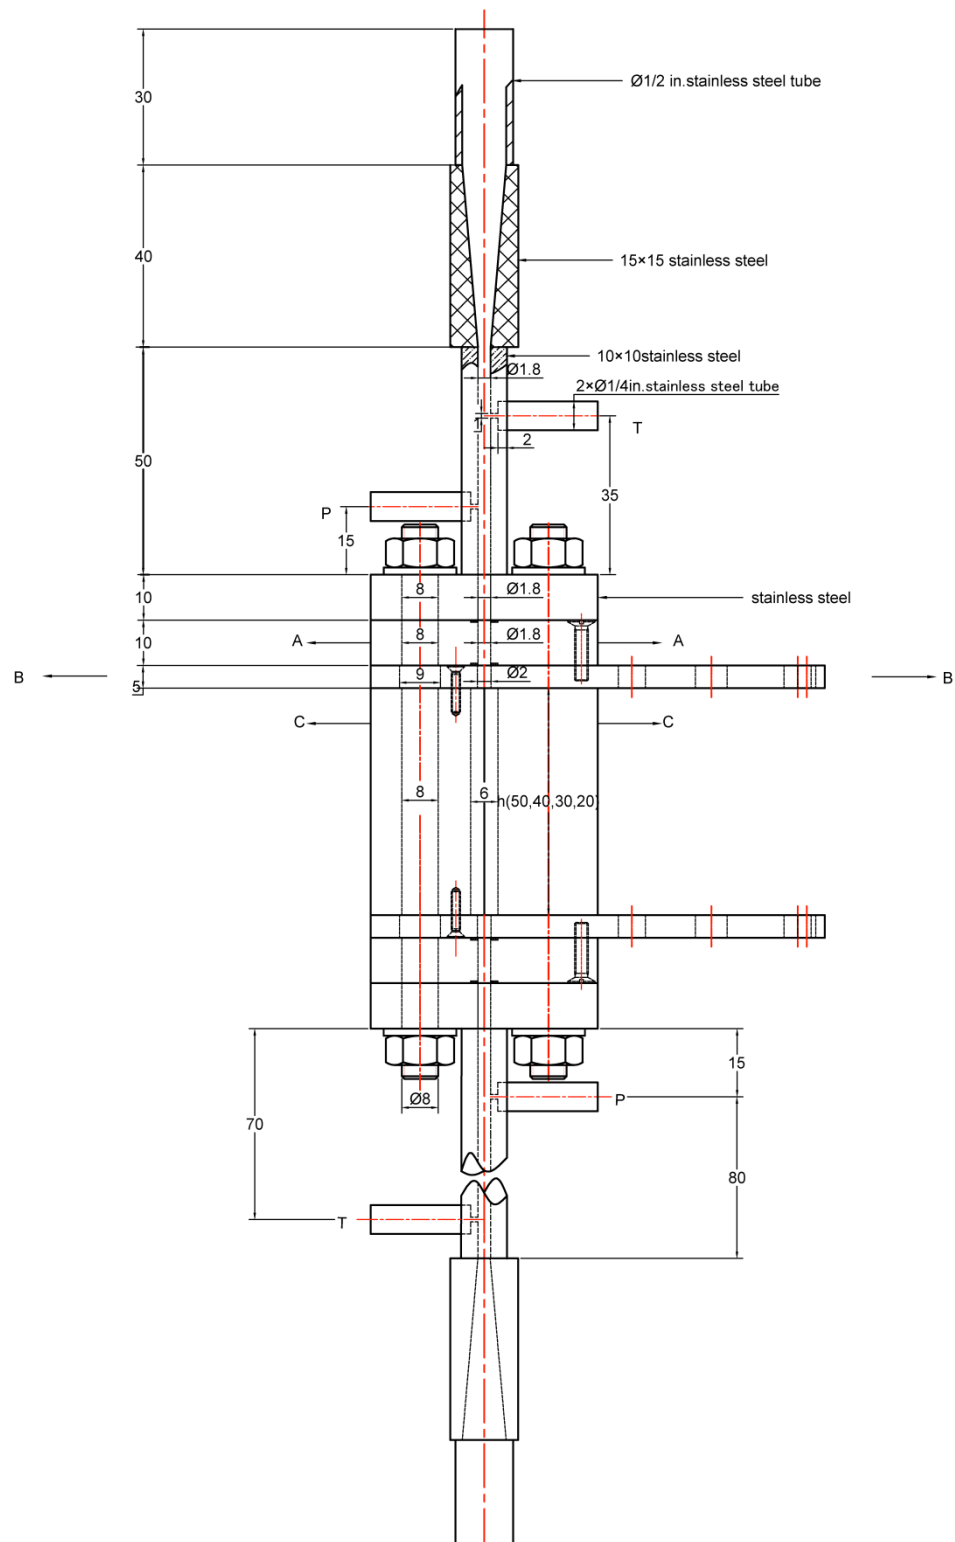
Dimensions of test section (example of $d = 1.8$ mm)
